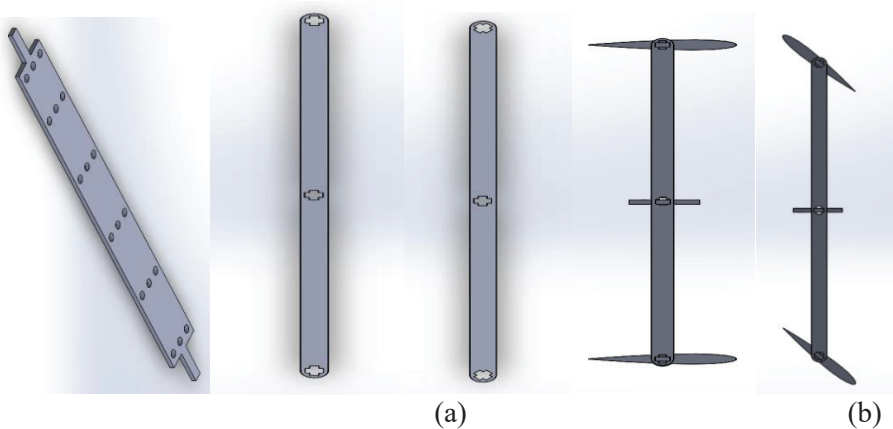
(a) Mounting elements of the turbines and (b) assembled Darrieus turbine blades (Ardıç, 2019)
